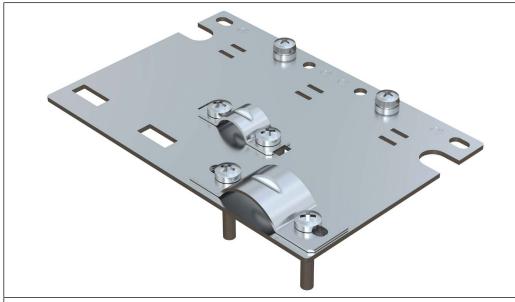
Exemplary assembled shield connection braket for F6 housing 4
